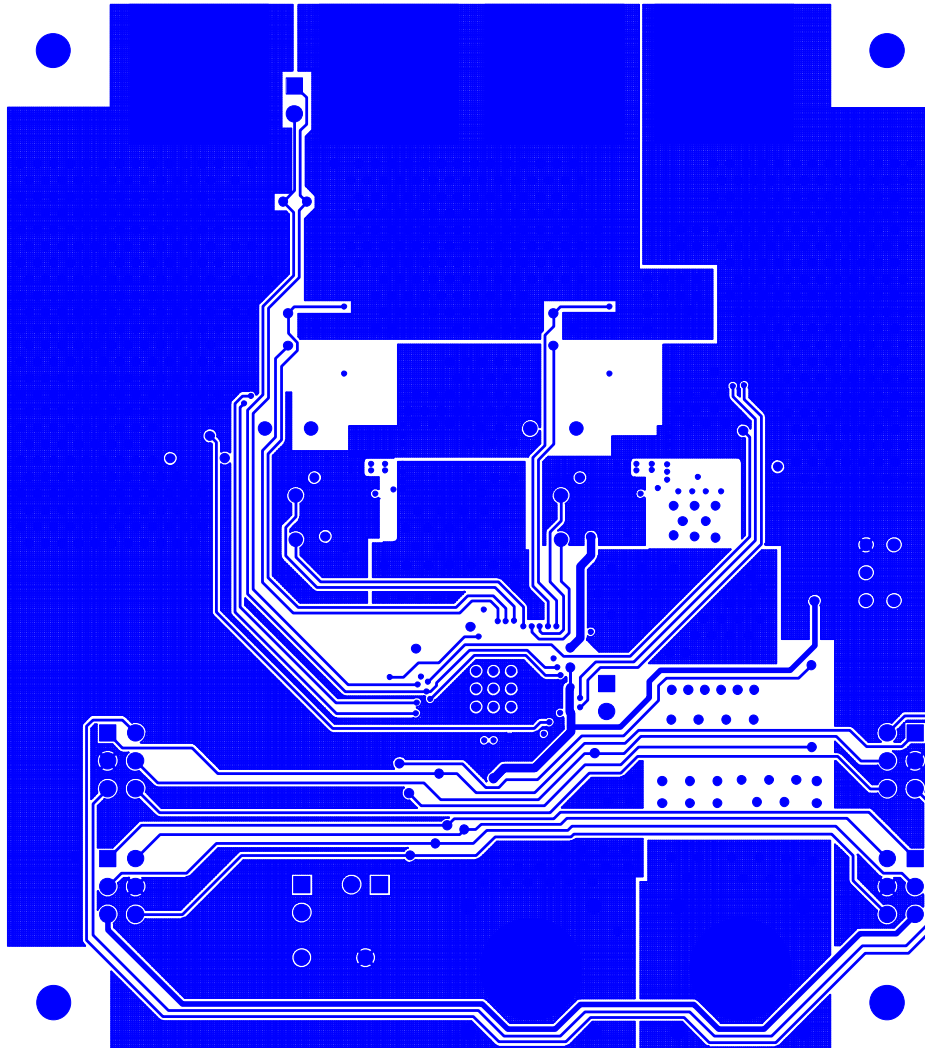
PCB - INNER LAYER 2 (TOP VIEW)
